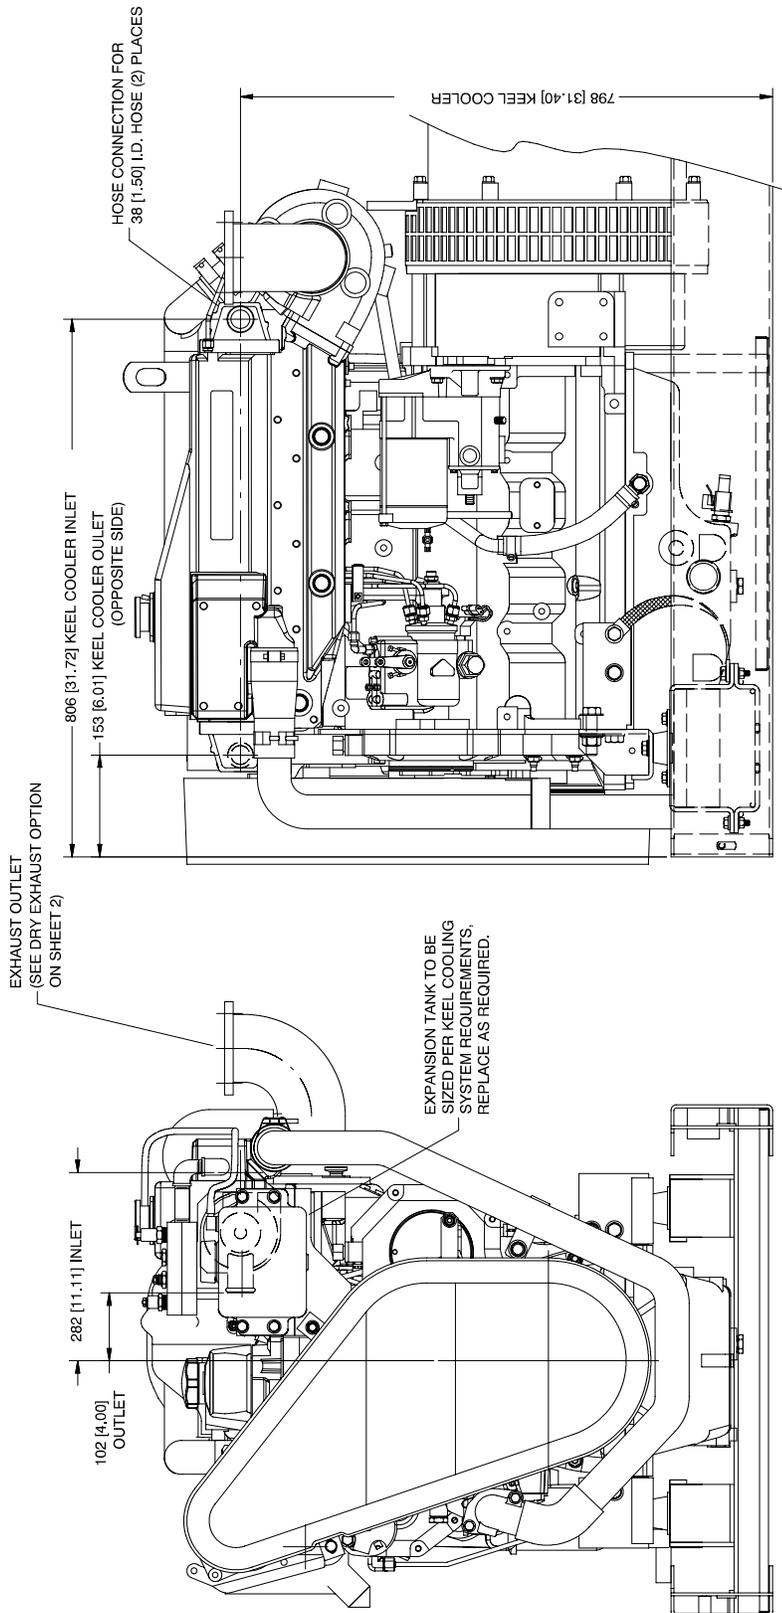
Dimension Drawing, 55/65EOZD and 45/50EFOZD with Sound Shield
